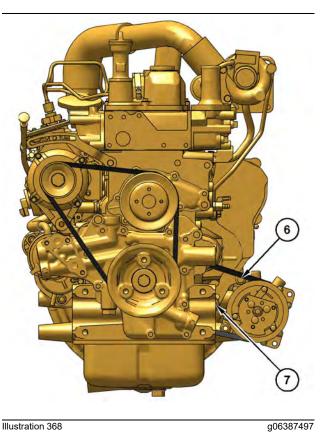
C3.3B (6) Mounting bolt (7) Adjusting bolt
